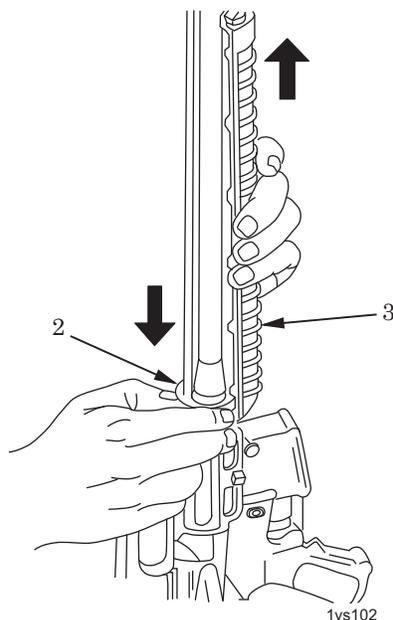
Removal of Lower Handguard Assembly (M16A2).
